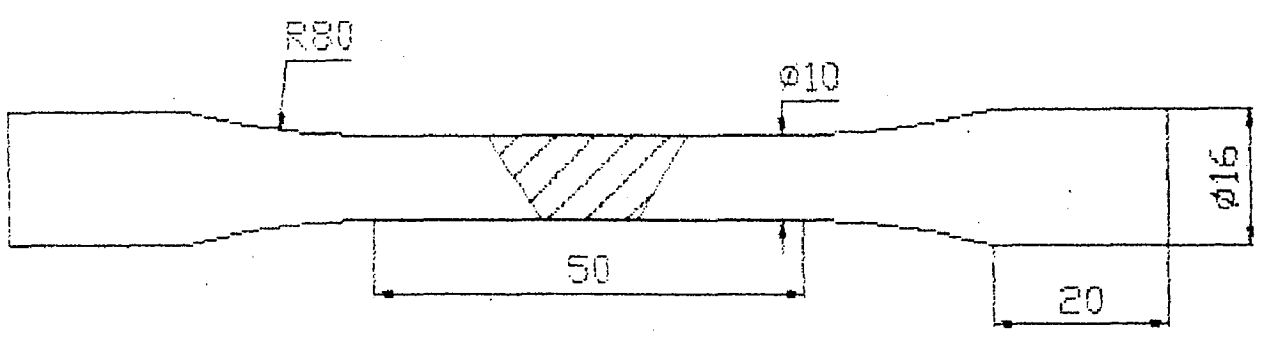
DIAGRAM SHOWING THE DIMENSIONS OF FATIGUE SPECIMEN
